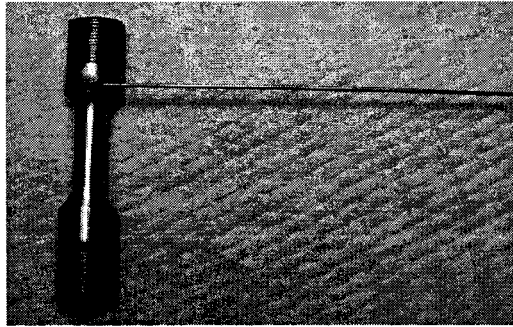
Spot-Welded Cylindrical Specimen
